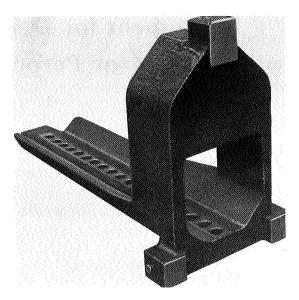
Three positioning pads lapped in same plane and perpendicular to gage holes.
